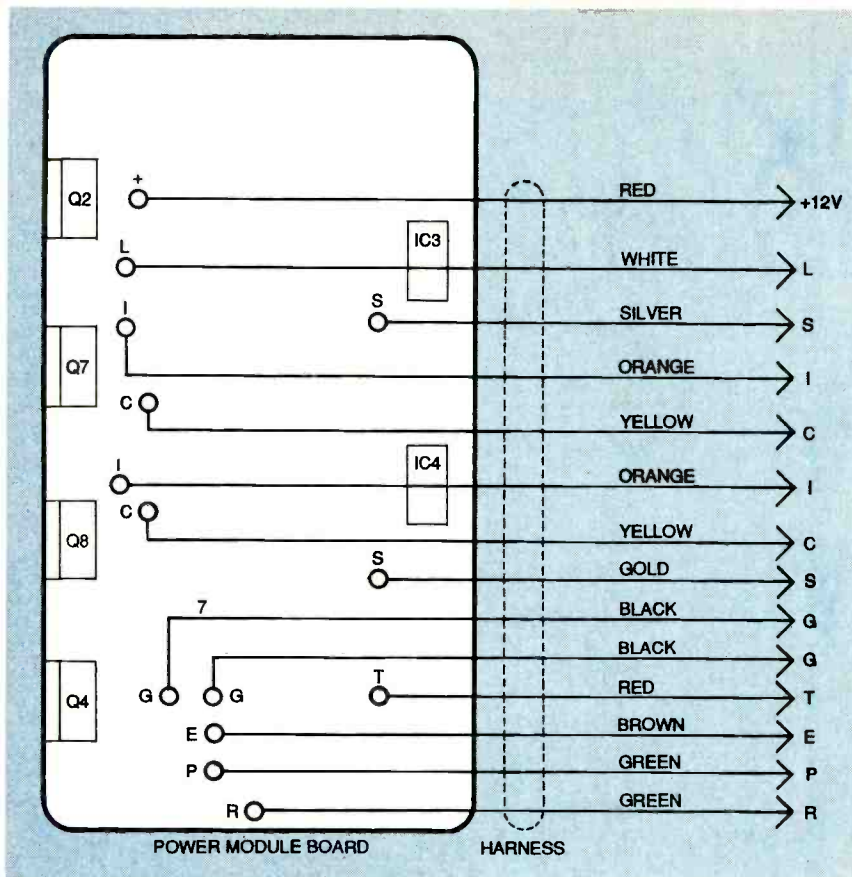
POWER-MODULE WIRING HARNESS. Color-coded hookup wires are soldered to the circuit board, as shown.
